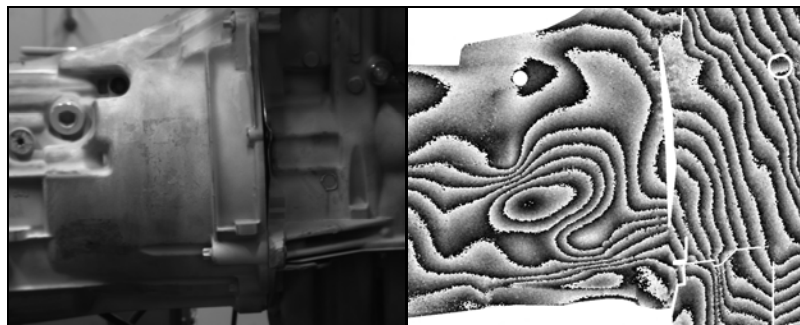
An engine - gearbox assembly, measured under operational conditions. The fringe pattern indicates independent vibration of the two components.
